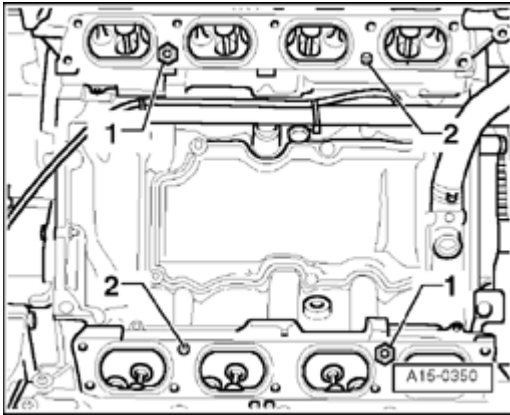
Replacing Intake Manifold Gaskets, Thereby Removing Locking Bolt
